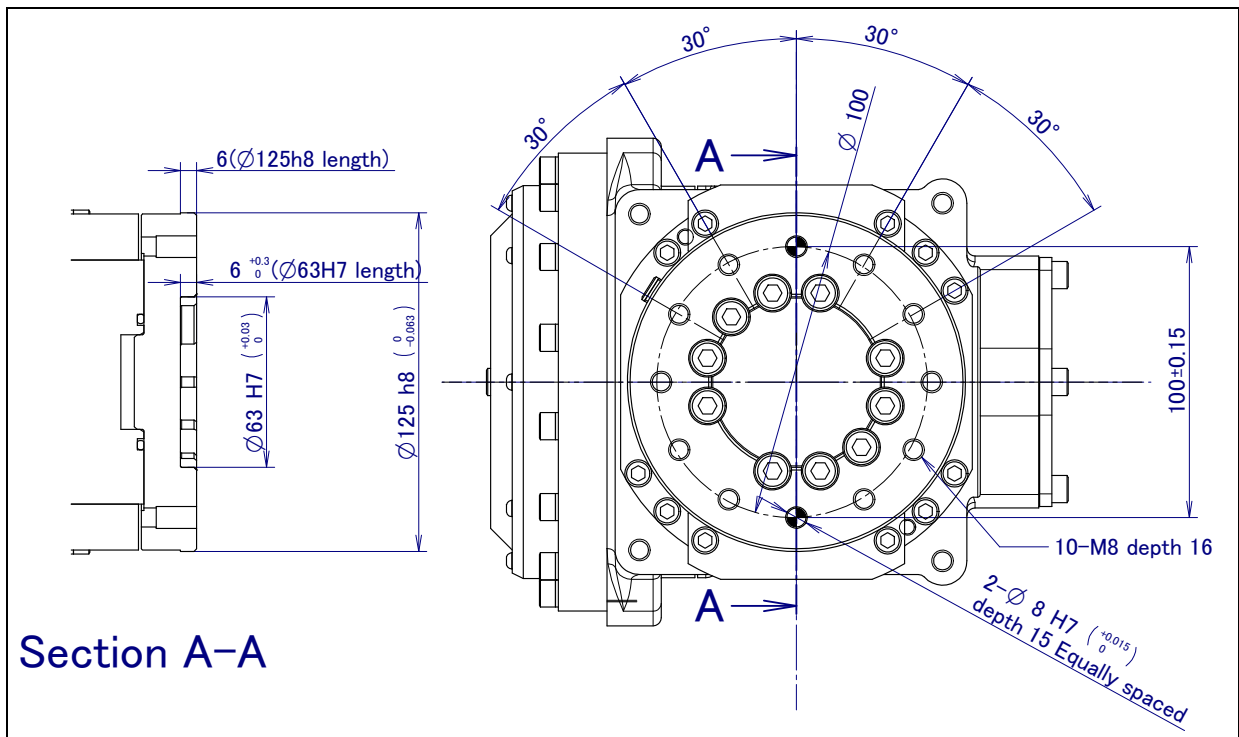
(a) ISO flange, ISO rust protection flange (M-710iC/50, /70, /50H, /50S)
